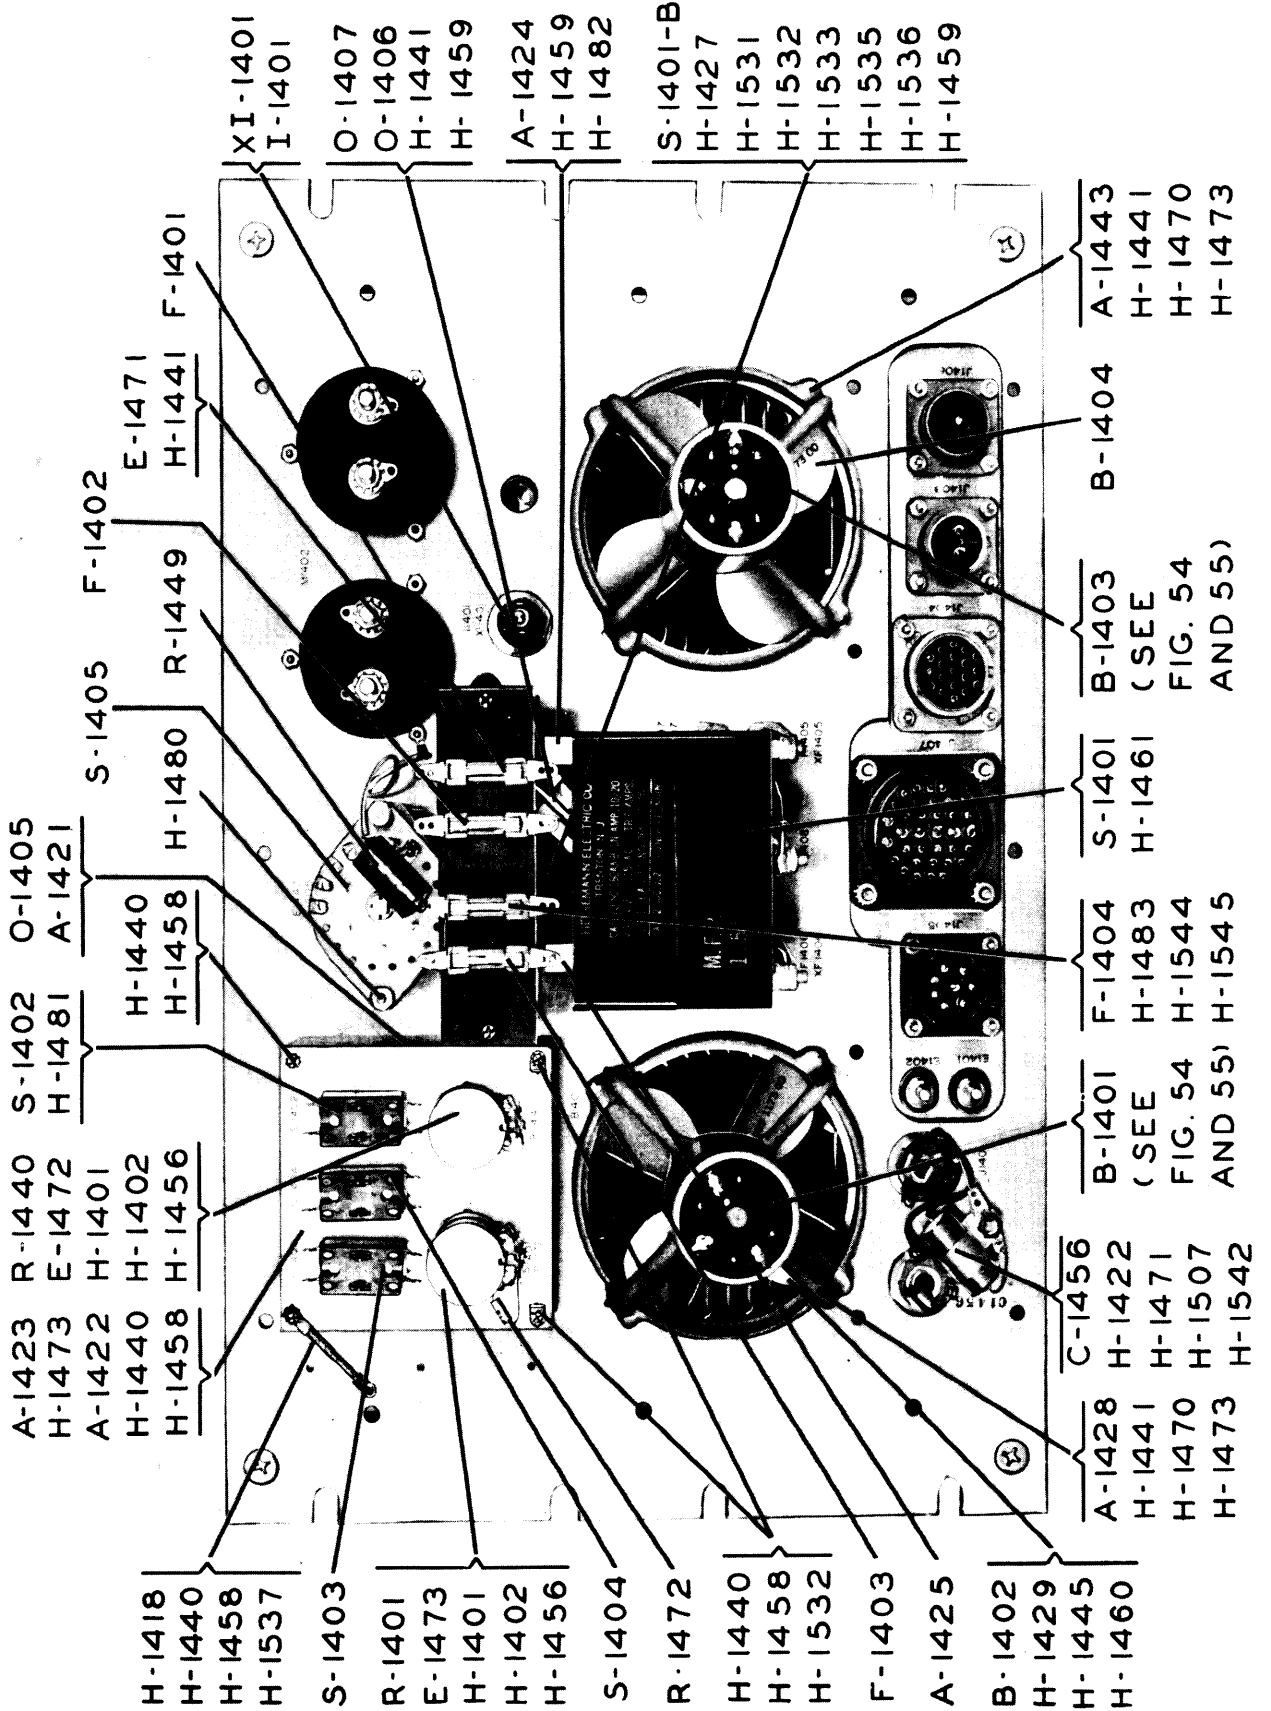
Modulator-Power Supply MD-129A/GR, Rear View of Front Panel
